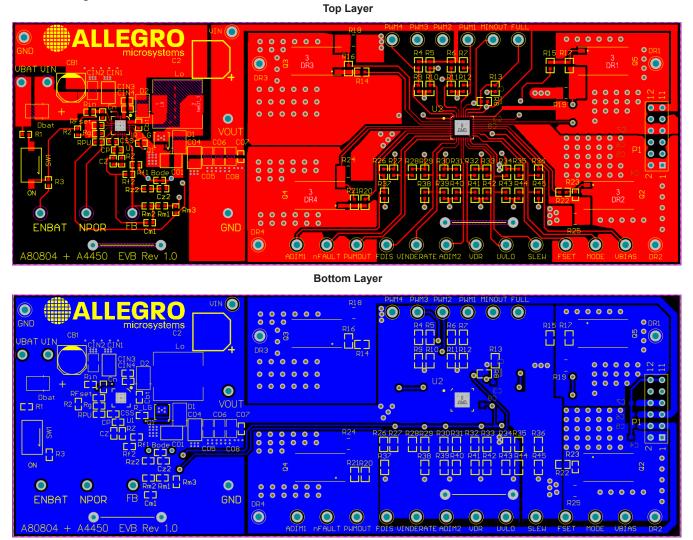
Layout of the A4450- and A80804-integrated LED driver showing the top layer (top) and bottom layer (bottom) layouts.
